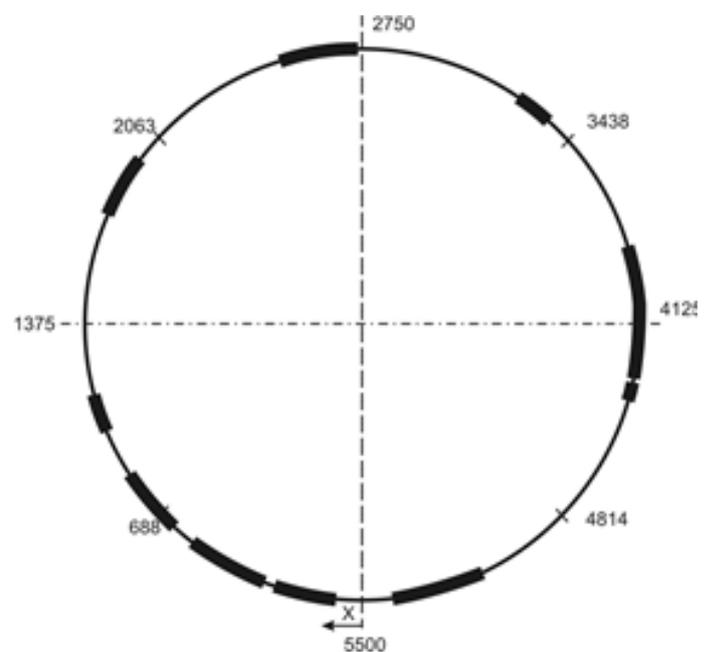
Schematic diagram of the location of indications (cracks) and their length in the weld at a depth of approximately 26 mm
